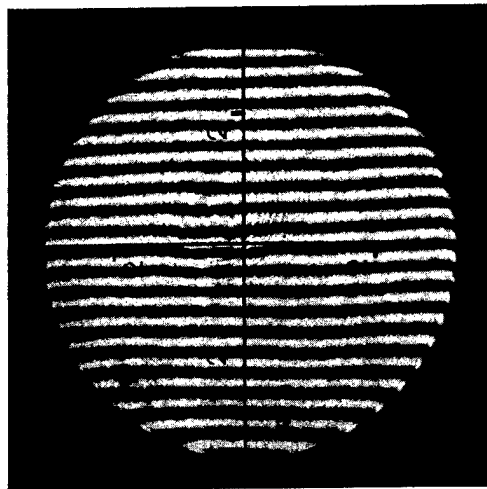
24-in.-diameter spherical surface figured by the 50-in. XY machine
